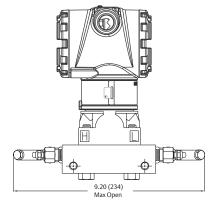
Rosemount 3051 Wireless Housing with Coplanar Flange
